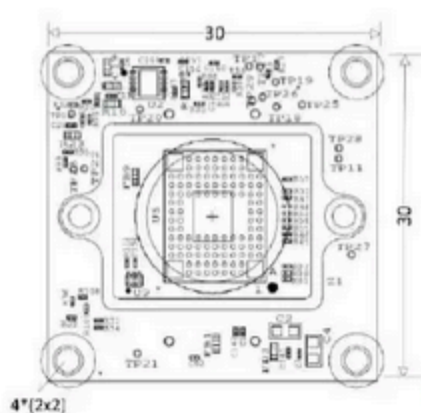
e-CAM315_CUMI900M_MOD_H02R1 – Top View Mechanical Dimensions
